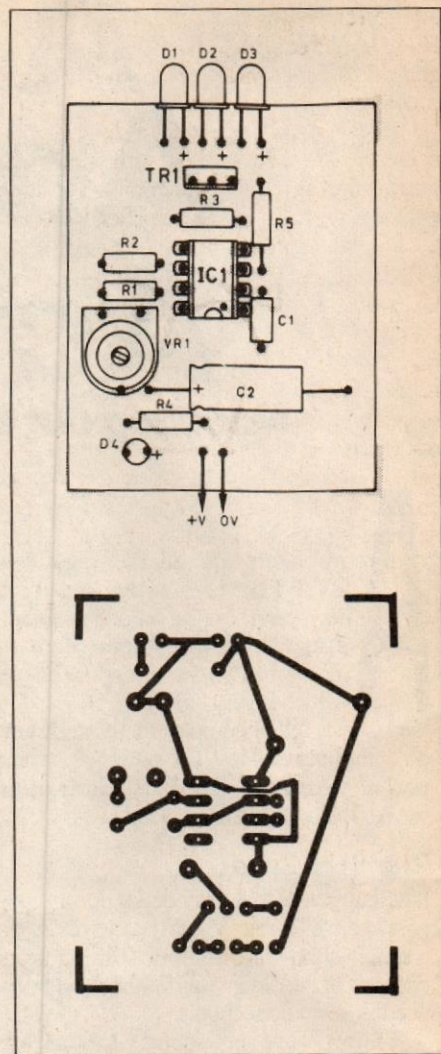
The component overlay (top) and the PCB for the transmitter.
